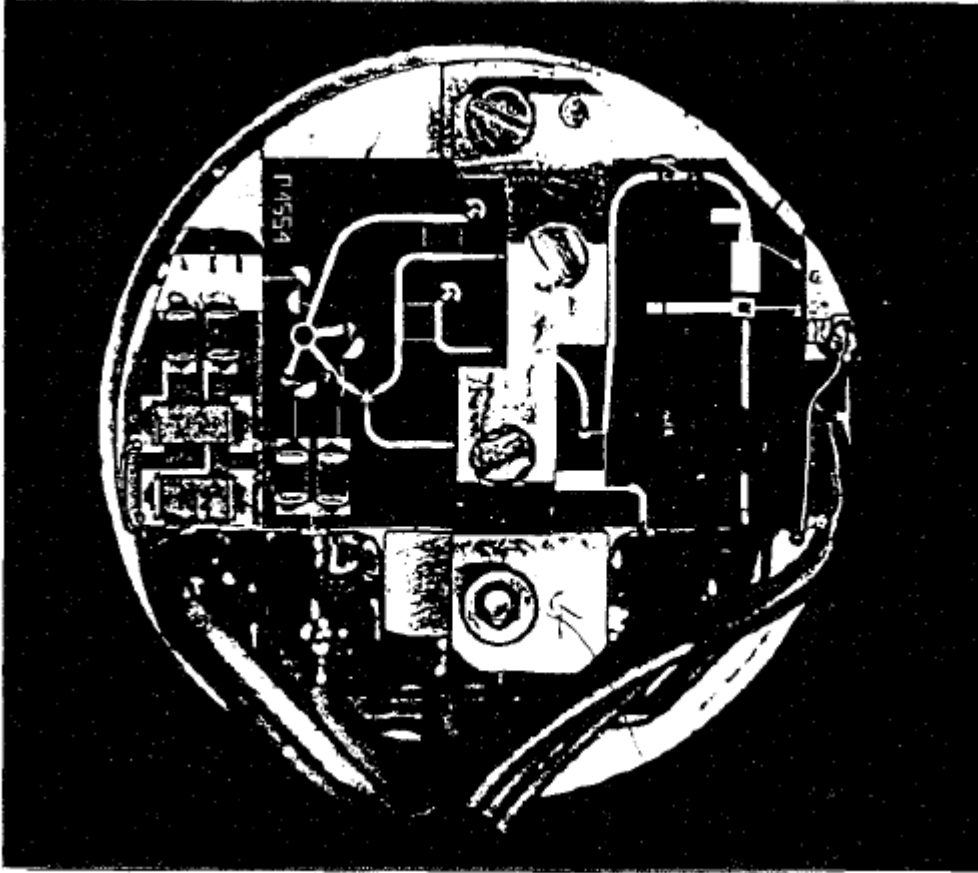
Assembled FMCW RADAR Head 25mm diameter.
